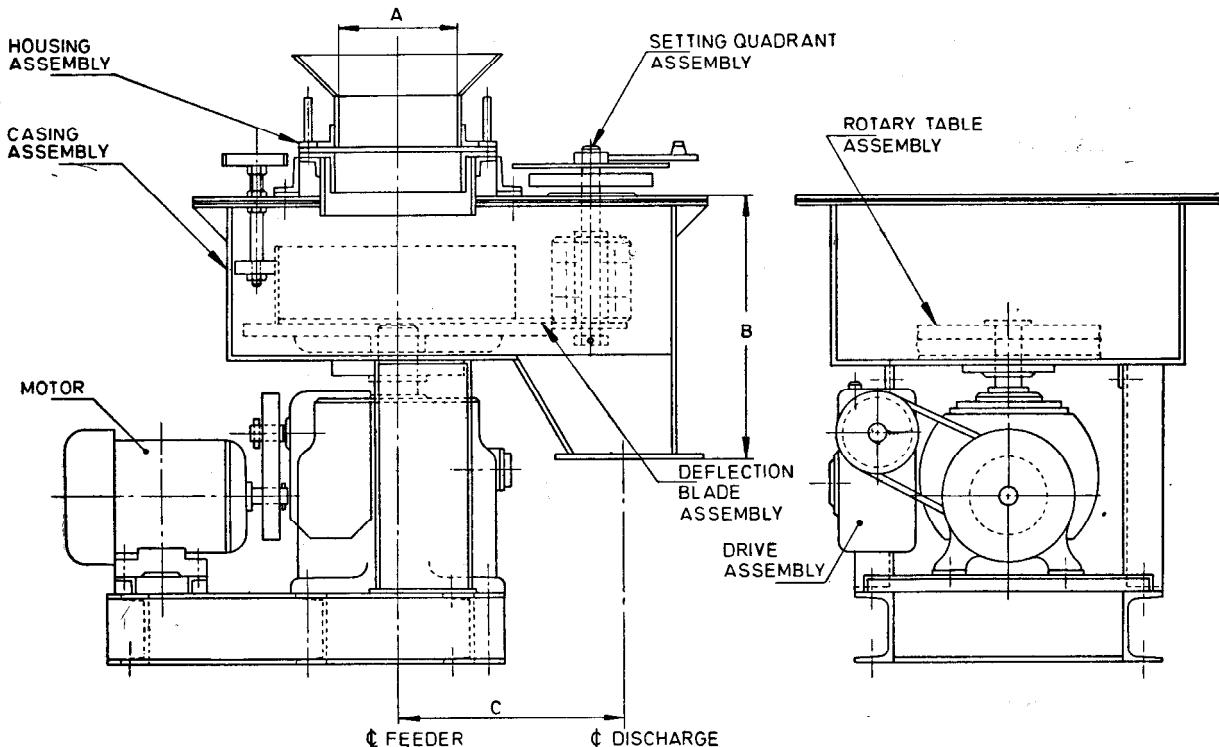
ROTARY TABLE FEEDER ILLUSTRATION
